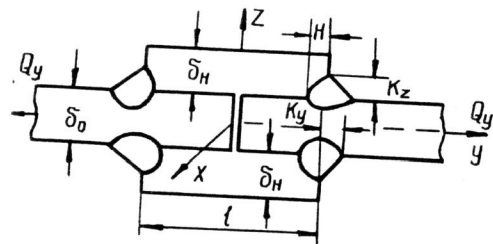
Transverse fillet welds of a butt joint with cover plates
